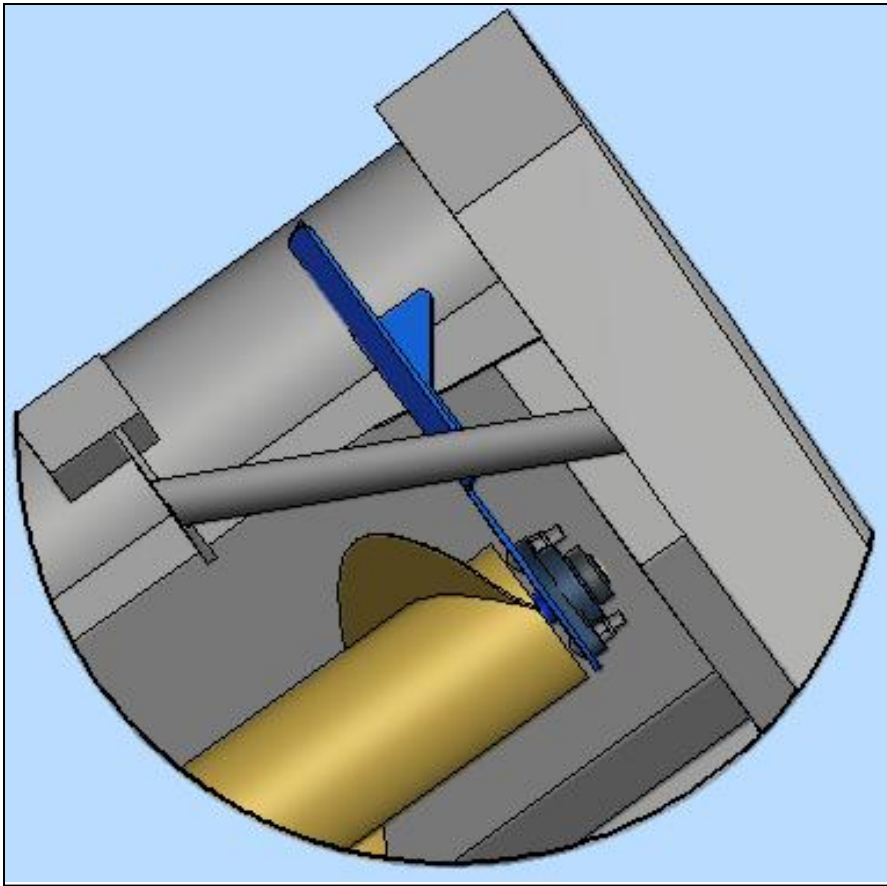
LEFT END WELD ON MOUNT (TOP VIEW)
